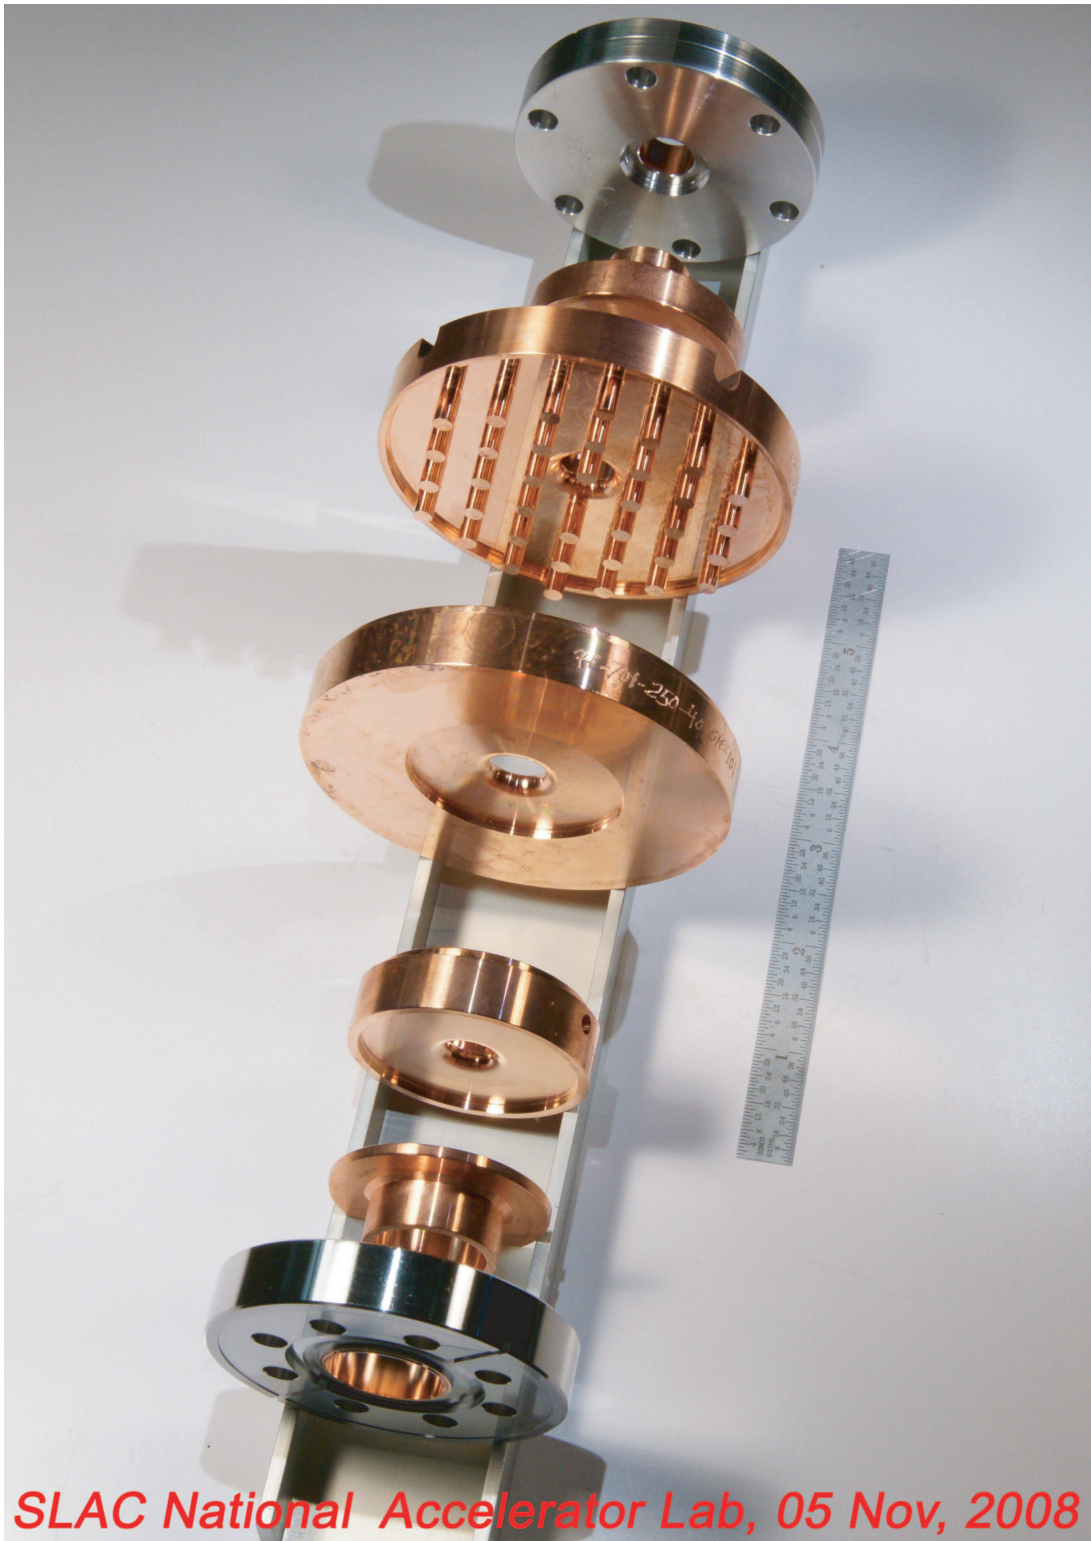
Machined PBG structure parts prior to brazing. Courtesy of SLAC.
